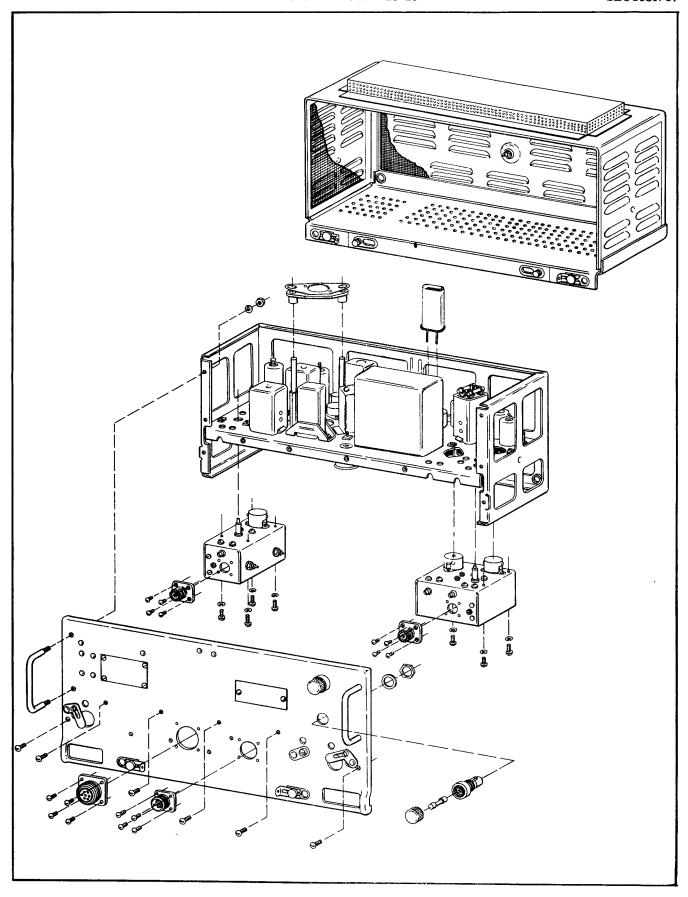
Radio Receiver and Transmitter BC-788-E, Exploded View
